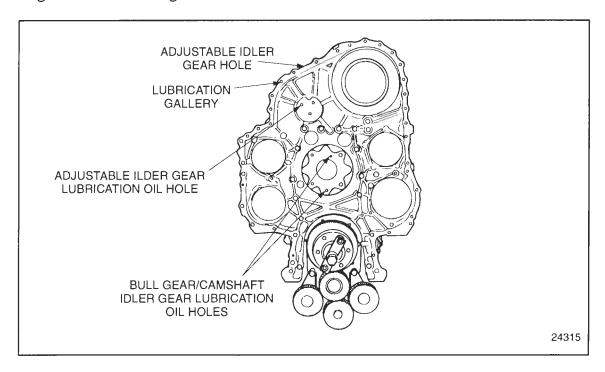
Gear Train Lubricating Oil Hole Locations
